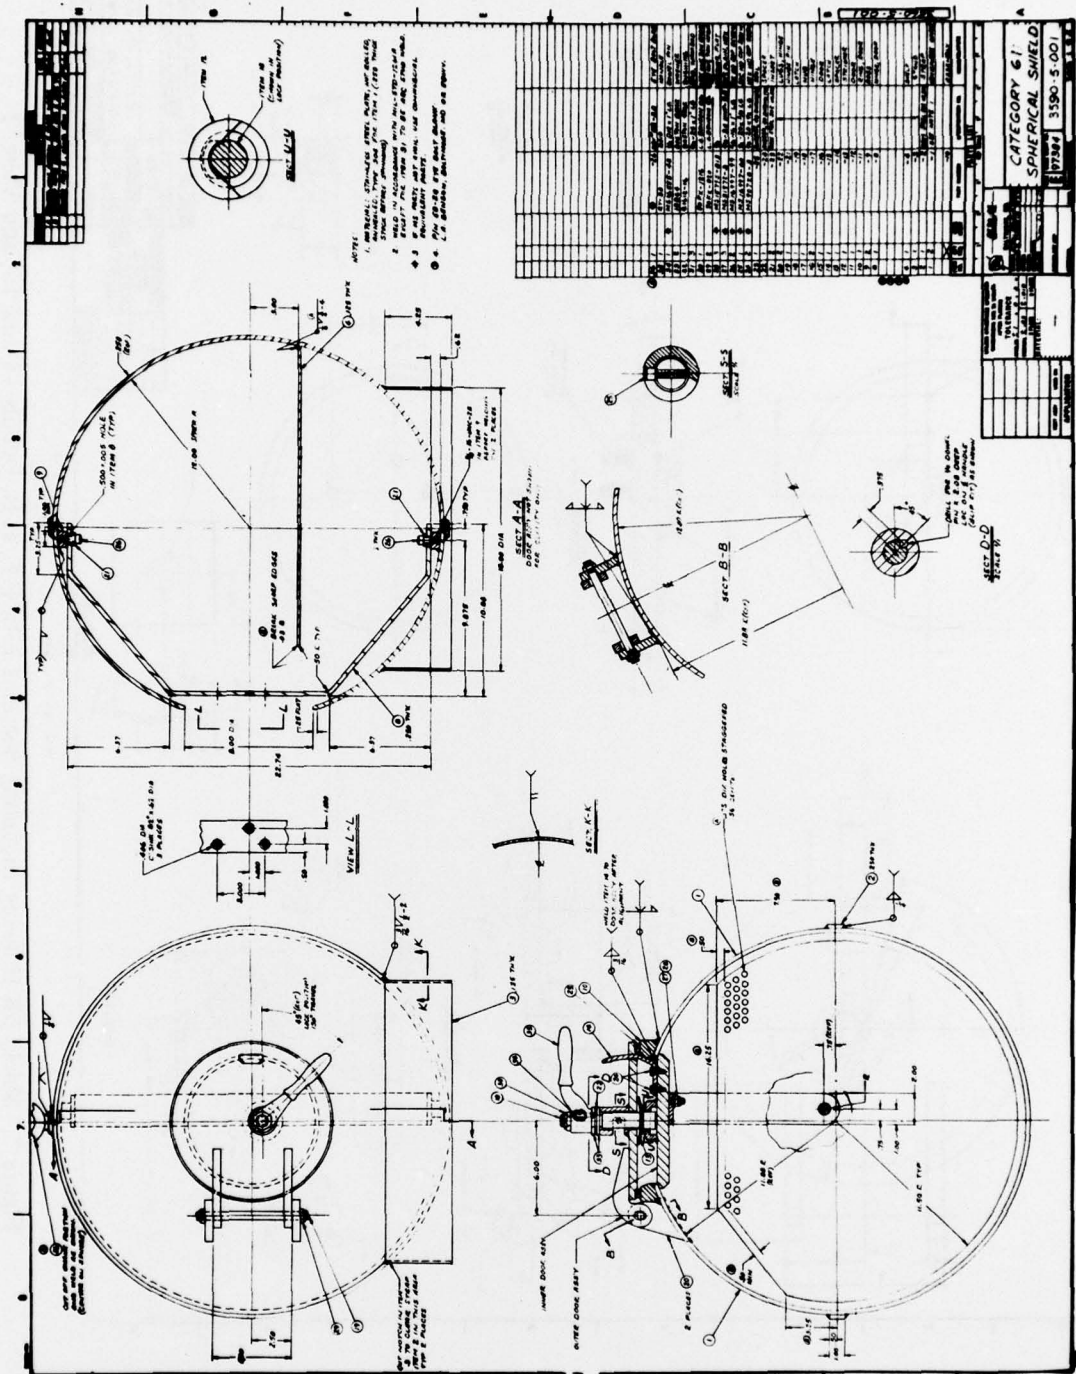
Shield 6B Drawing Including Sections A-A, D-D, K-K, L-L, S-S, and U-U
